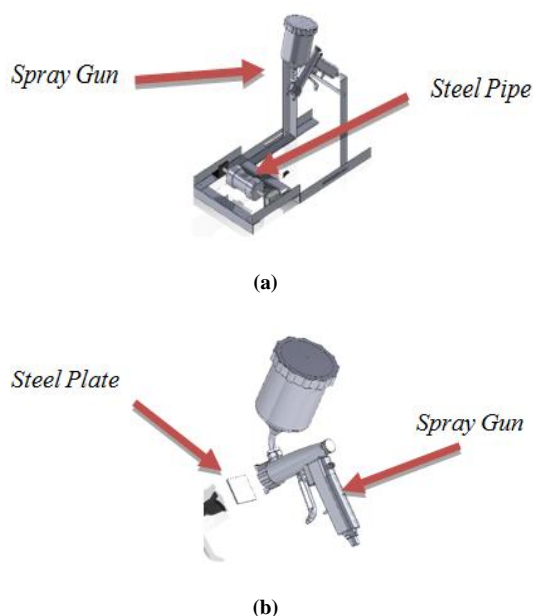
Illustration of Coating on SS 316 Substrate, (a) Coating on Pipe Specimen and (b) Coating on Plate Specimen
